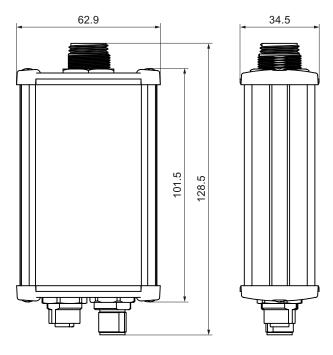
Dimension drawing of the PC adapter for SIMATIC RF-DIAG (all dimensions in mm)
